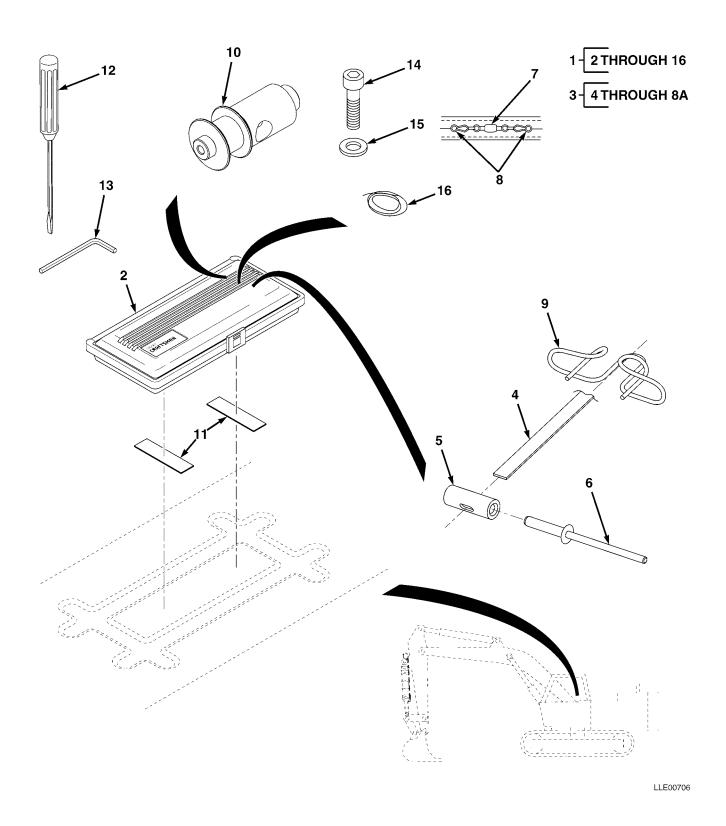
BUCKET CYLINDER BELT SYSTEM TOOL BOX
